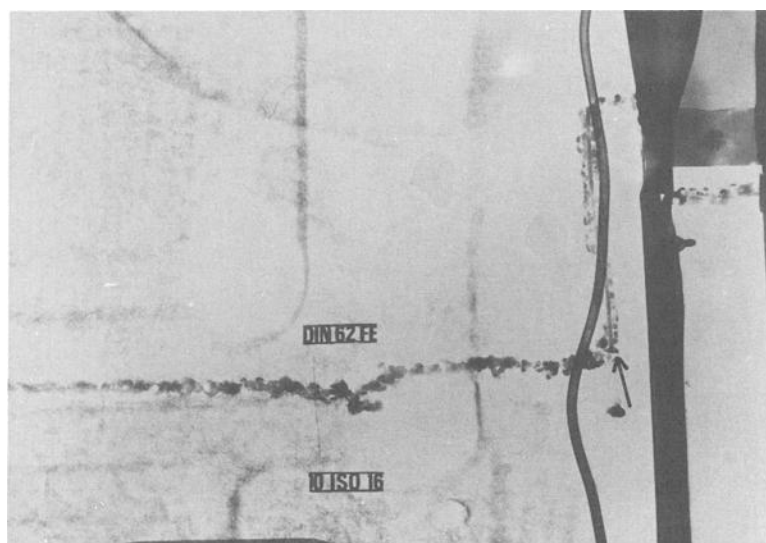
Positive of radiograph of vehicle's front floor; irregular line is a nonoriginal welding seam. Arrow points to a large nail that was placed as filler in the welding seam.
